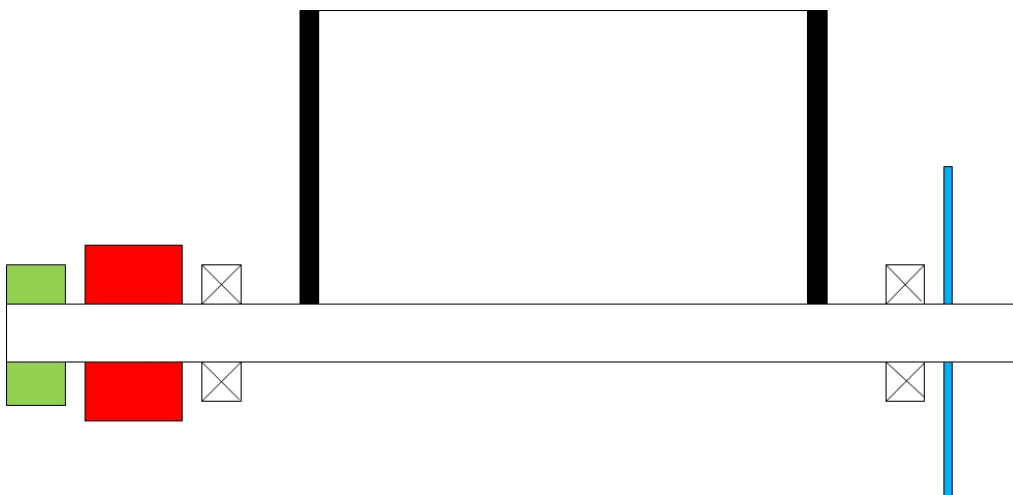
Schematic drawing of shaft assembly. The components mounted on the shaft are (from the left): resolver, electric motor, bearing, forks, bearing and optical disc.
